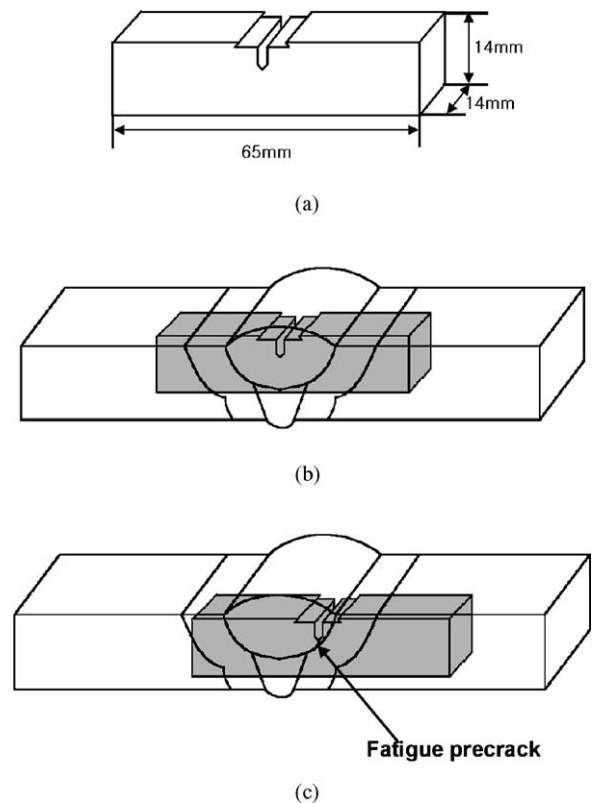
Schematic diagrams of (a) CTOD specimen geometry; notch locations of (b) weld metal specimen and (c) HAZ specimen.
